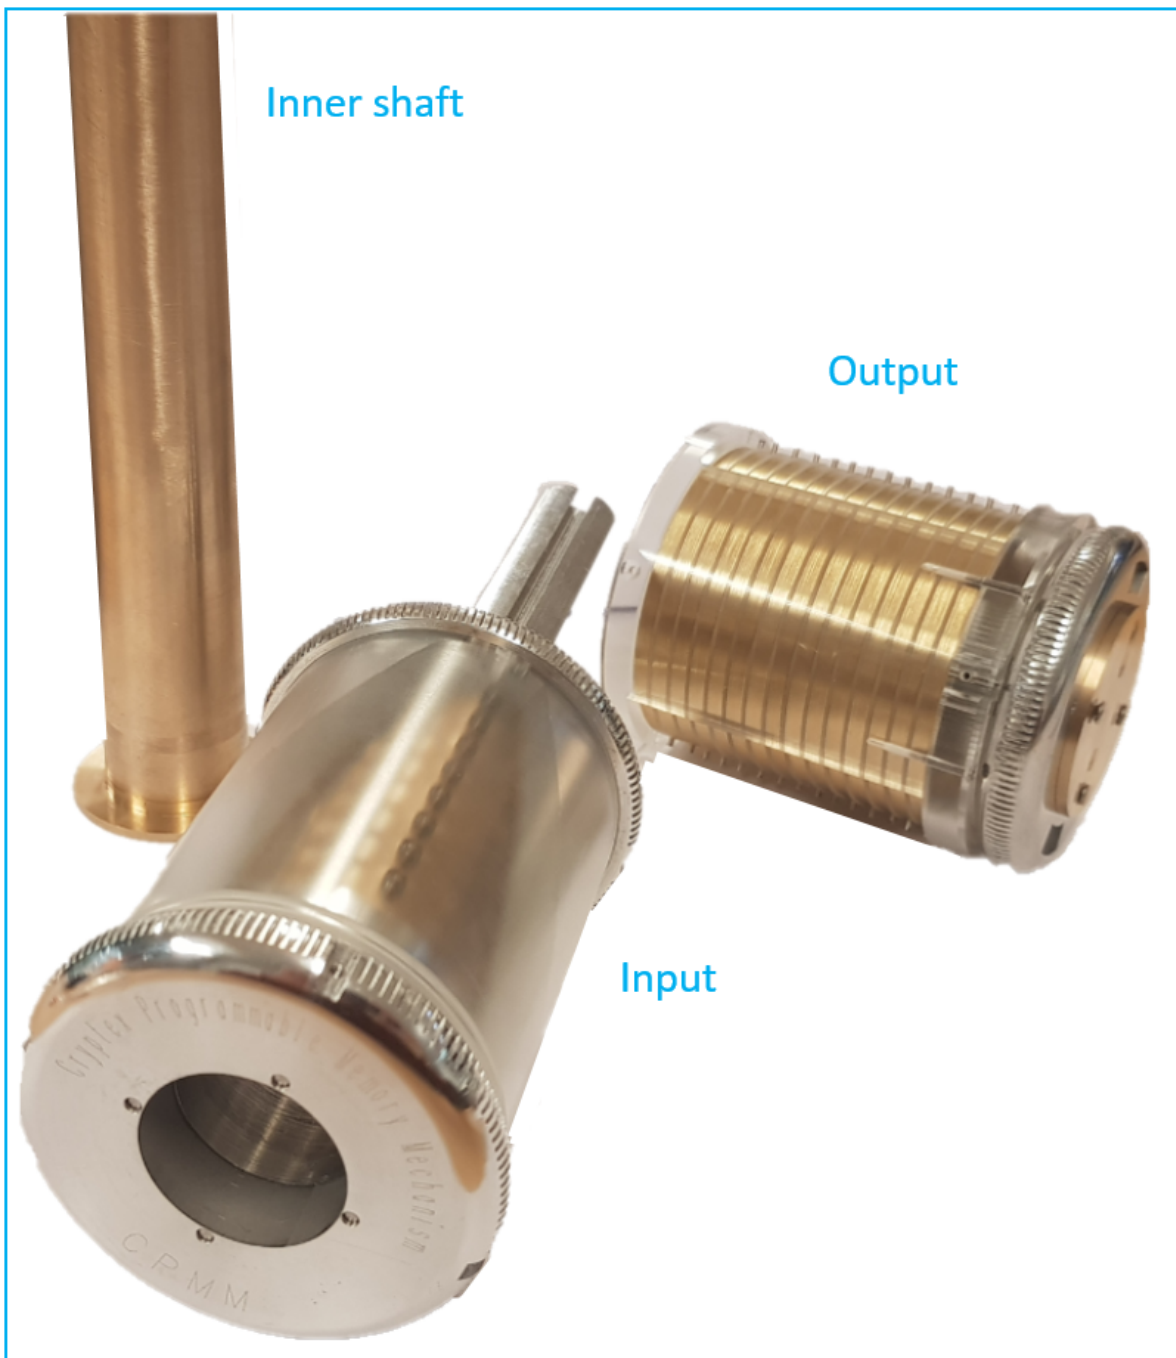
Machined prototype: picture of the three building assemblies. The input includes the input knob, input shaft, translational motion mechanism, memory rings, H-beams, the front casing and the translational motion knob. The output consists out of the reading rings and their frame, the fixed shaft, end-knob, the casing middle part and casing end part.
